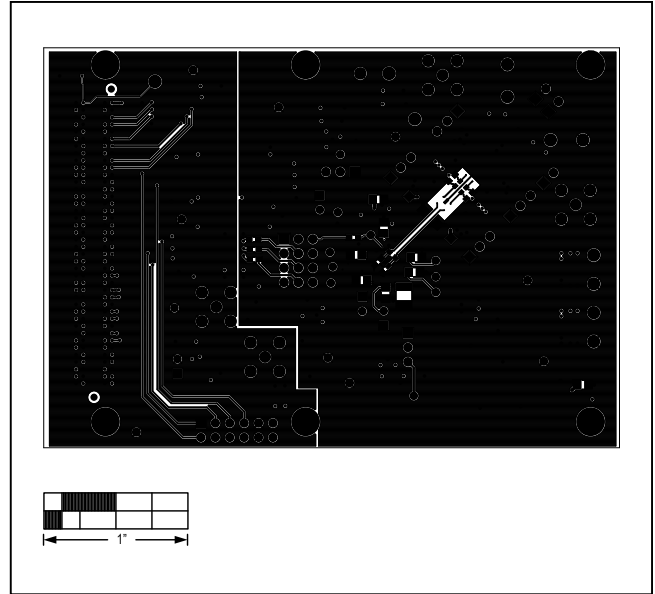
MAX11905 Differential EV Kit PCB Layout—Solder Side
